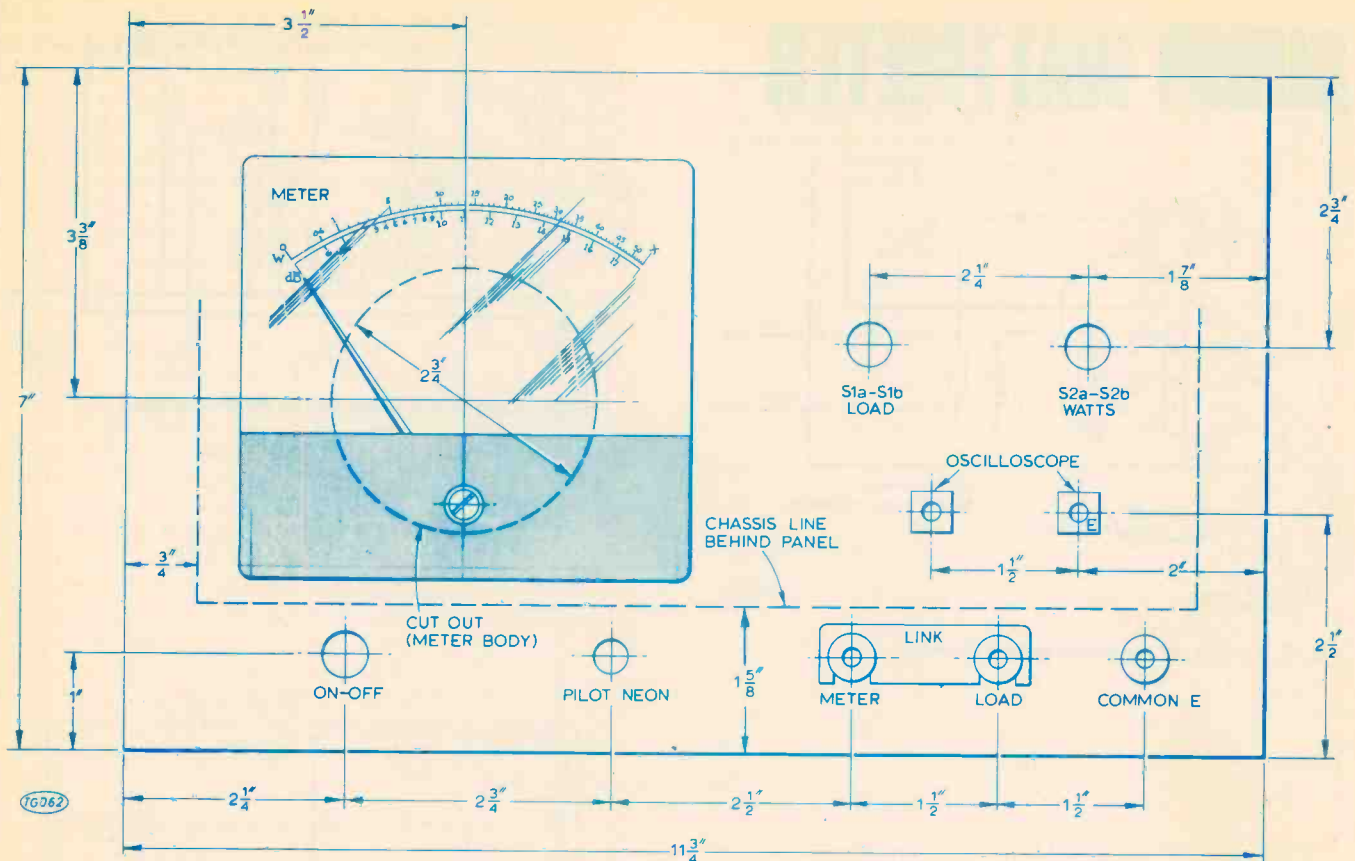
Front panel layout and drilling details. b) Position of chassis at rear of front panel.
